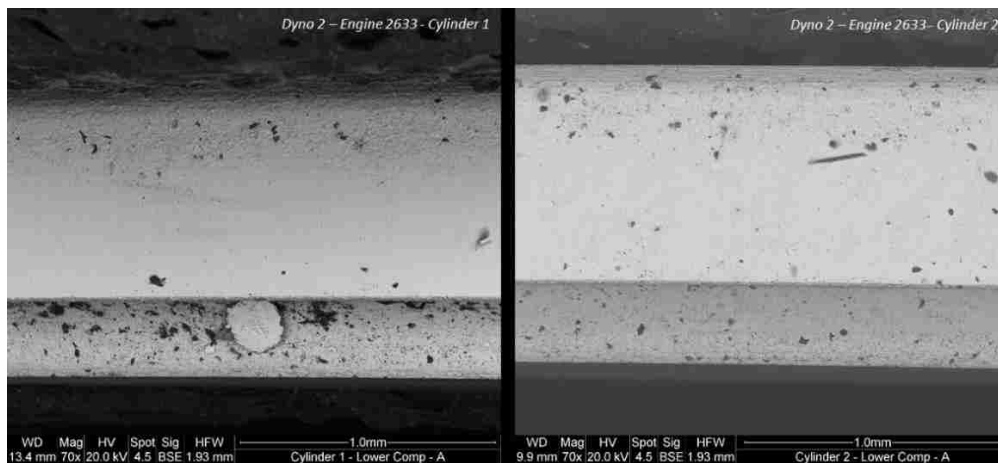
Dynamometer 2 - Engine 2633 - Teardown - Lower Compression Rings - Cylinder 1 & 2
